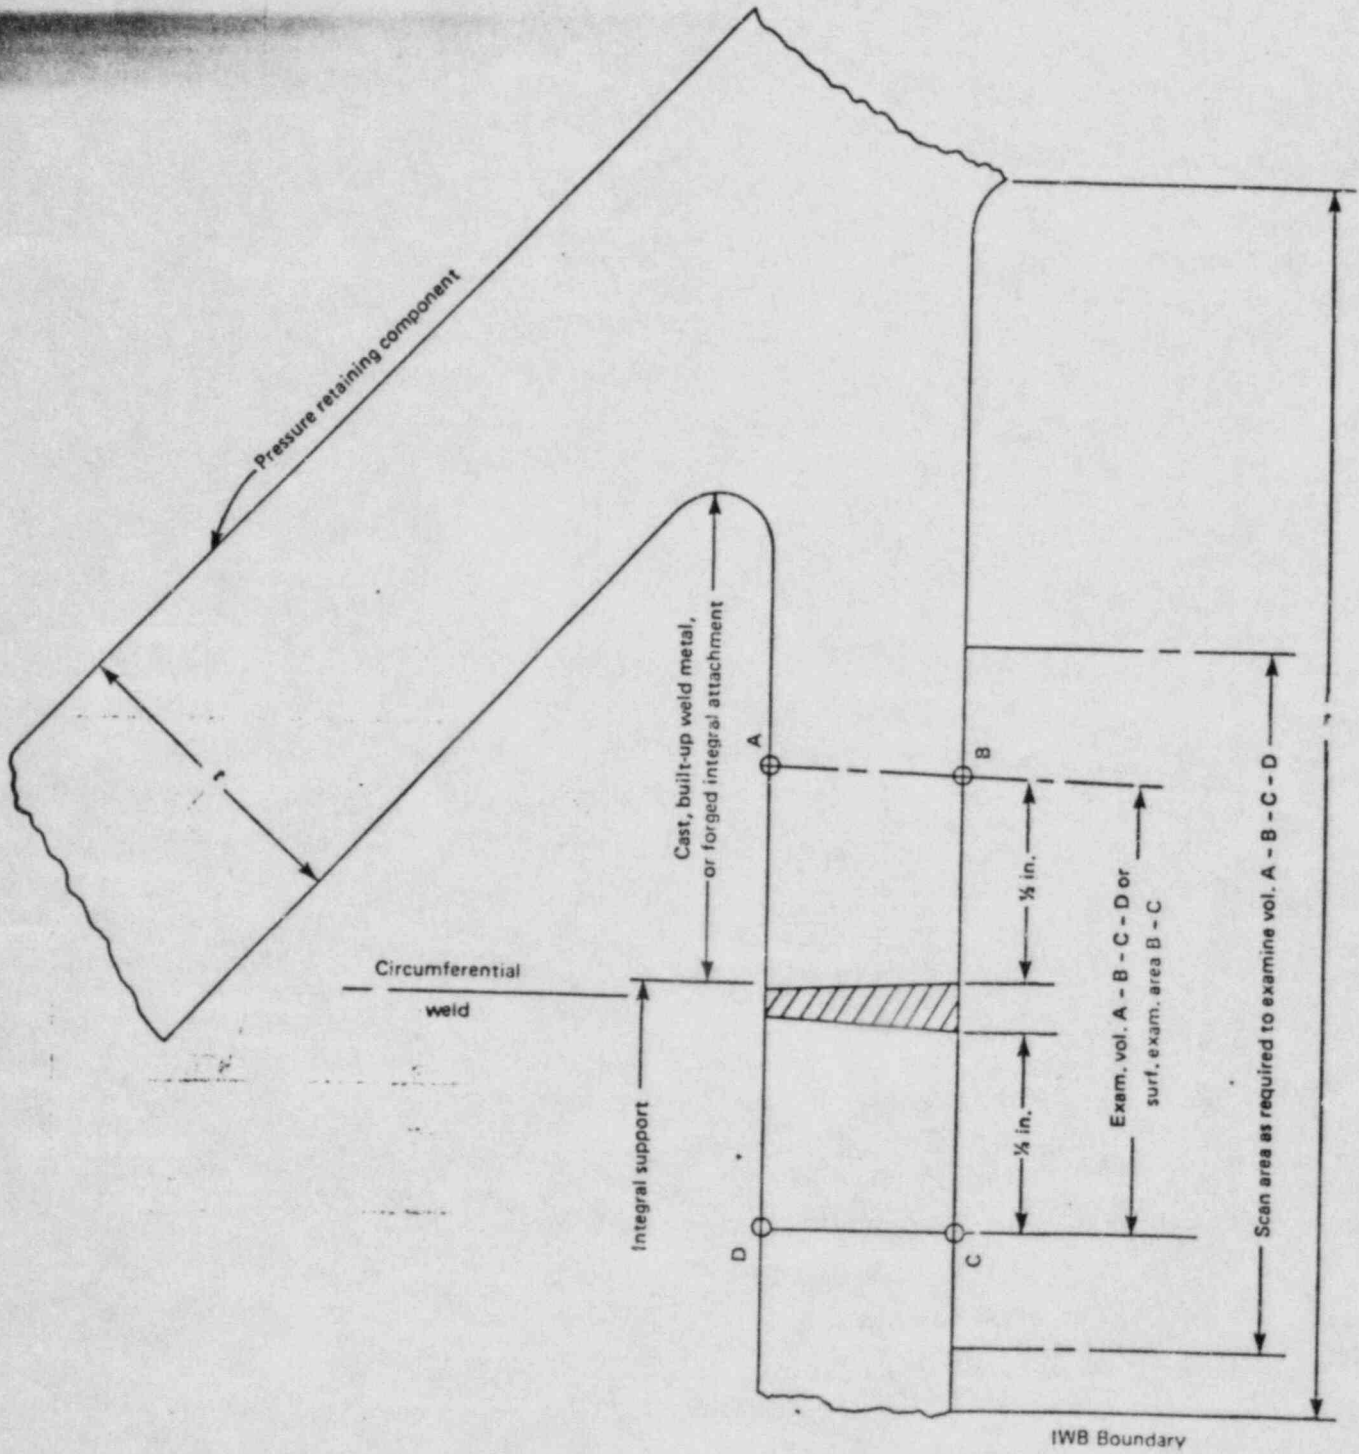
INTEGRAL ATTACHMENT WELD
